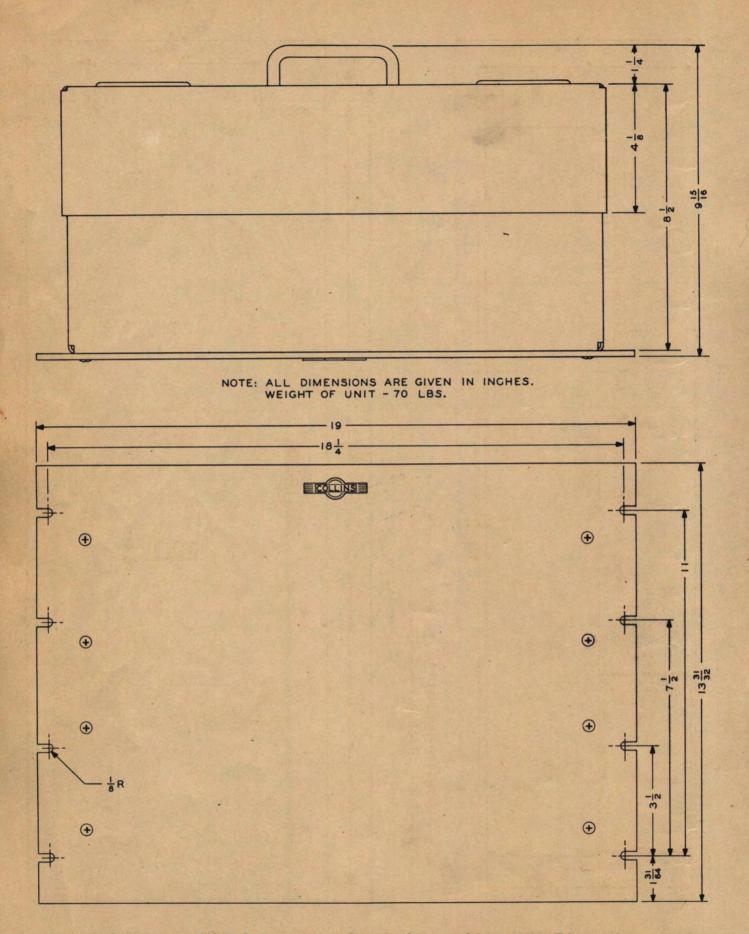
Type 409U-2 Power Supply, Outline and Mounting Dimensions
